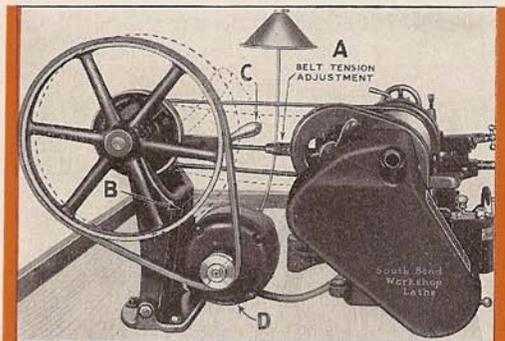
Horizontal V-Belt Motor Drive Countershaft with Belt Tension Adjustment, for 9-inch "Workshop" Lathe. See Price Below.
